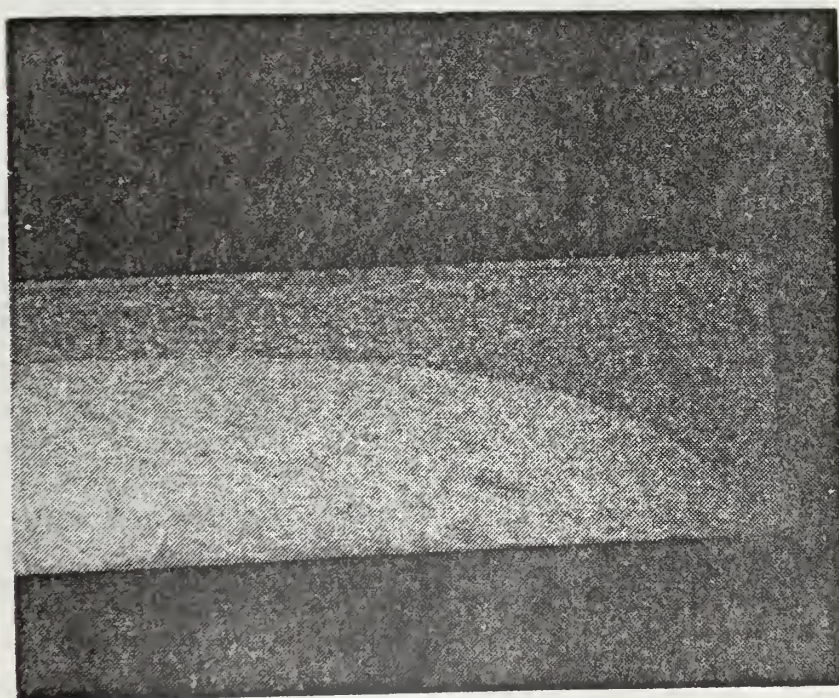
Macro-fractograph of specimen RI-1-6 which was under lower stress than RI-1-4 specimen in Fig. 78, showing a larger fatigue zone than Fig. 78. This specimen was fractured after 3,400,600 cycles at 40 ksi.
